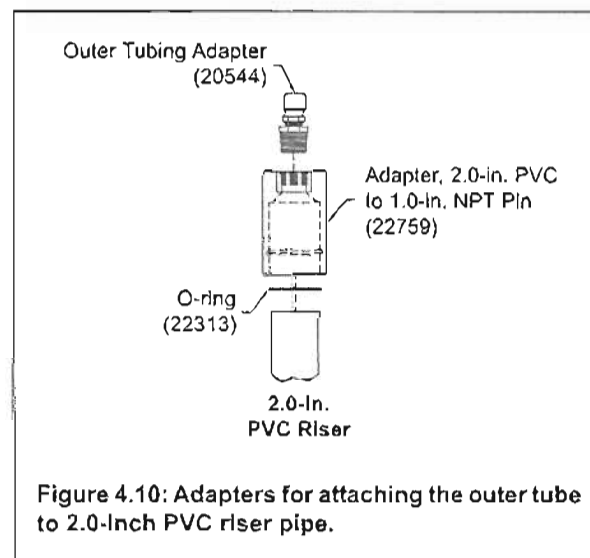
Adapters for attaching the outer tube to 2.0-Inch PVC riser pipe.
